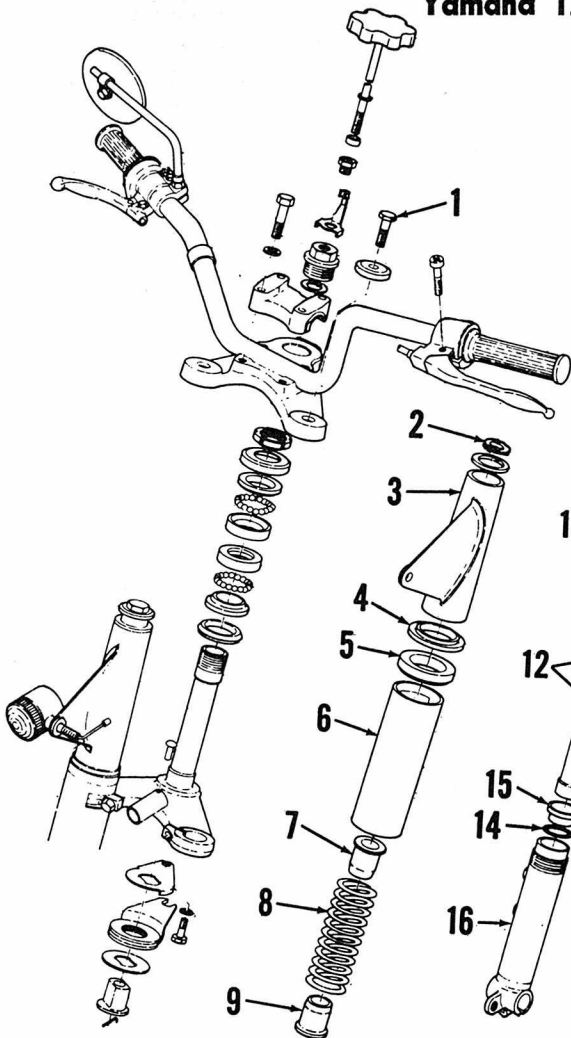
Exploded view of the front suspension system used on most models.
